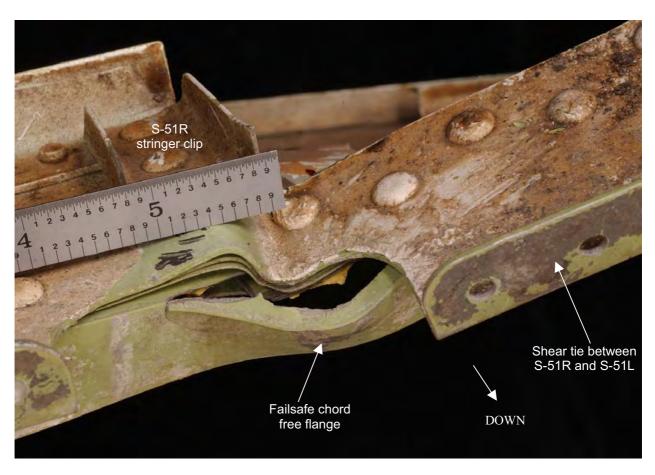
Fracture in failsafe chord free flange radius at S-51R of the STA 2040 frame segment.
